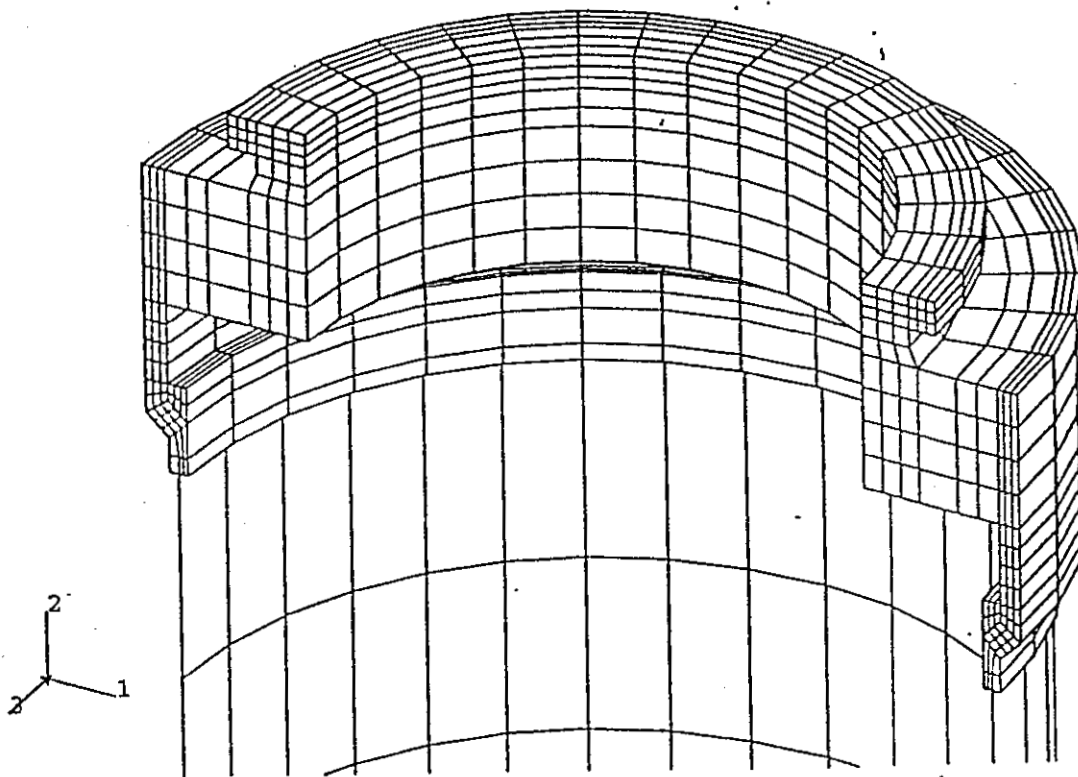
, Isometric View of Shield Plug with Compression Bolts
